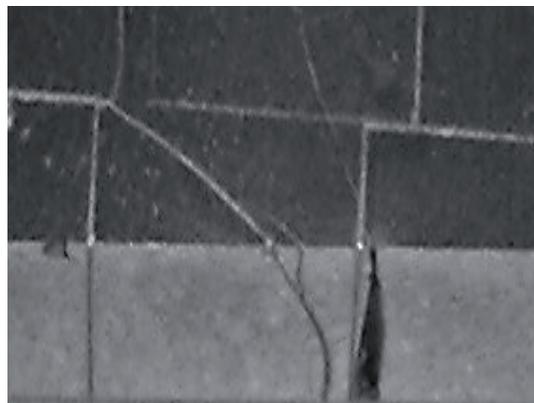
Cracks of WC-Co ISO K05 sinter plate, being the effect of too small thickness of a WC-Co ISO K05 sinter – Cu brazing filler metal – 14-5 PH steel joint; a side view
